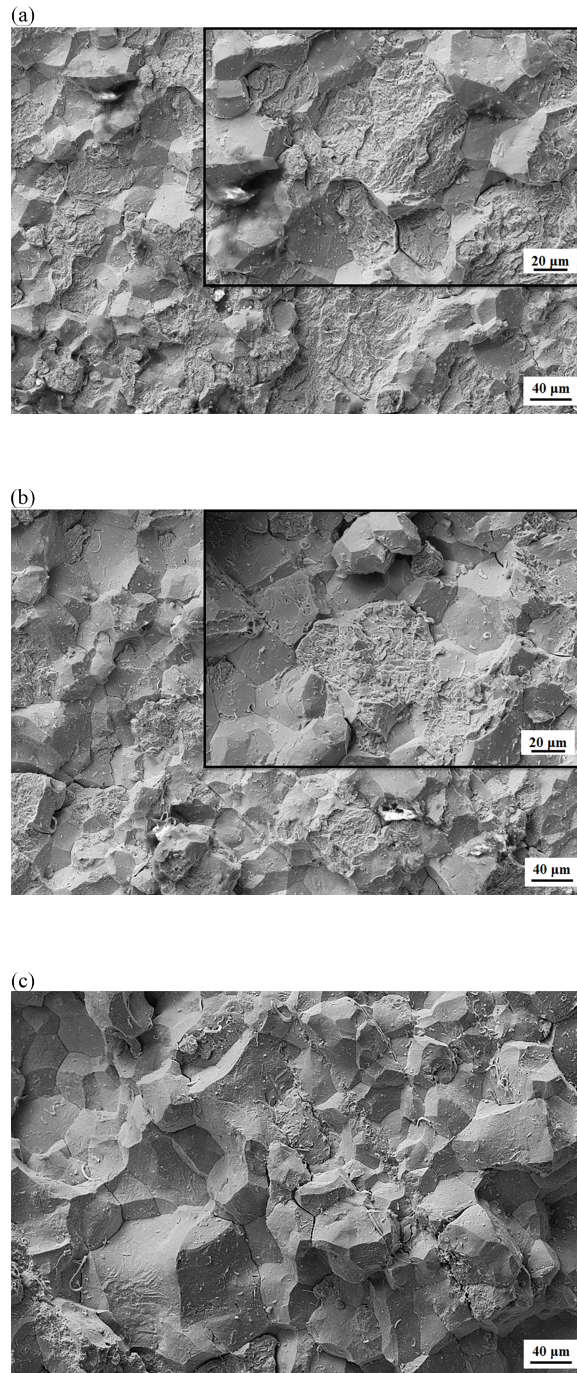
The fracture surface of the fractured heavy section at (a) Surface, (b) Mid-Radius, and (c) Center. The insets in (a) and (b) are higher magnification images showing ductile fracture features.
